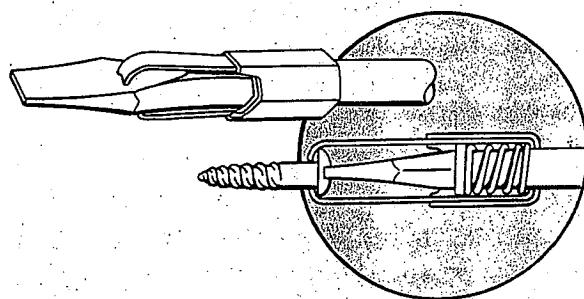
Starting Screwdriver (Shown Holding Screw)
